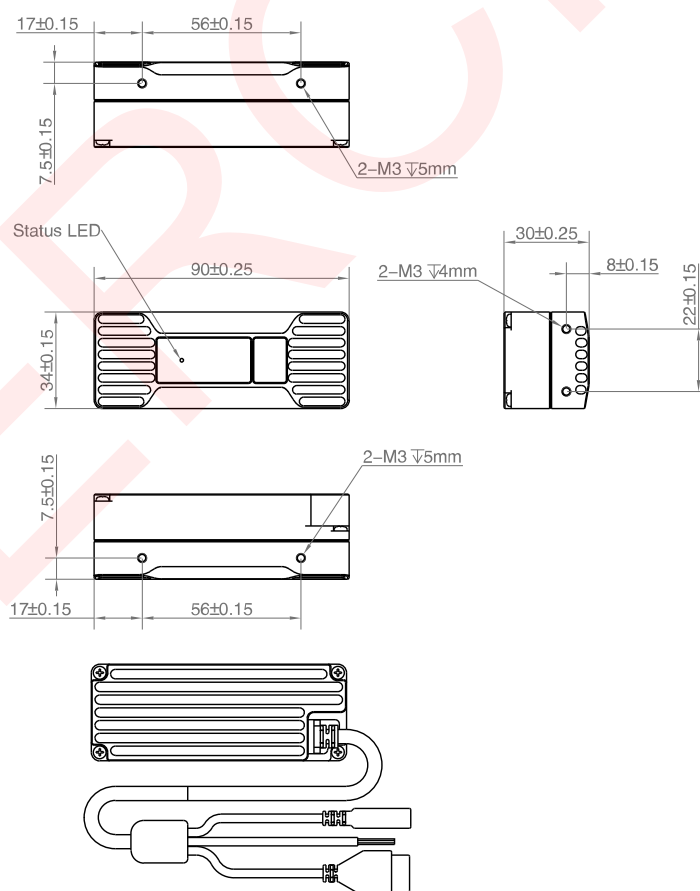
TM260-E2 Mechanical dimensions (unit: mm)
